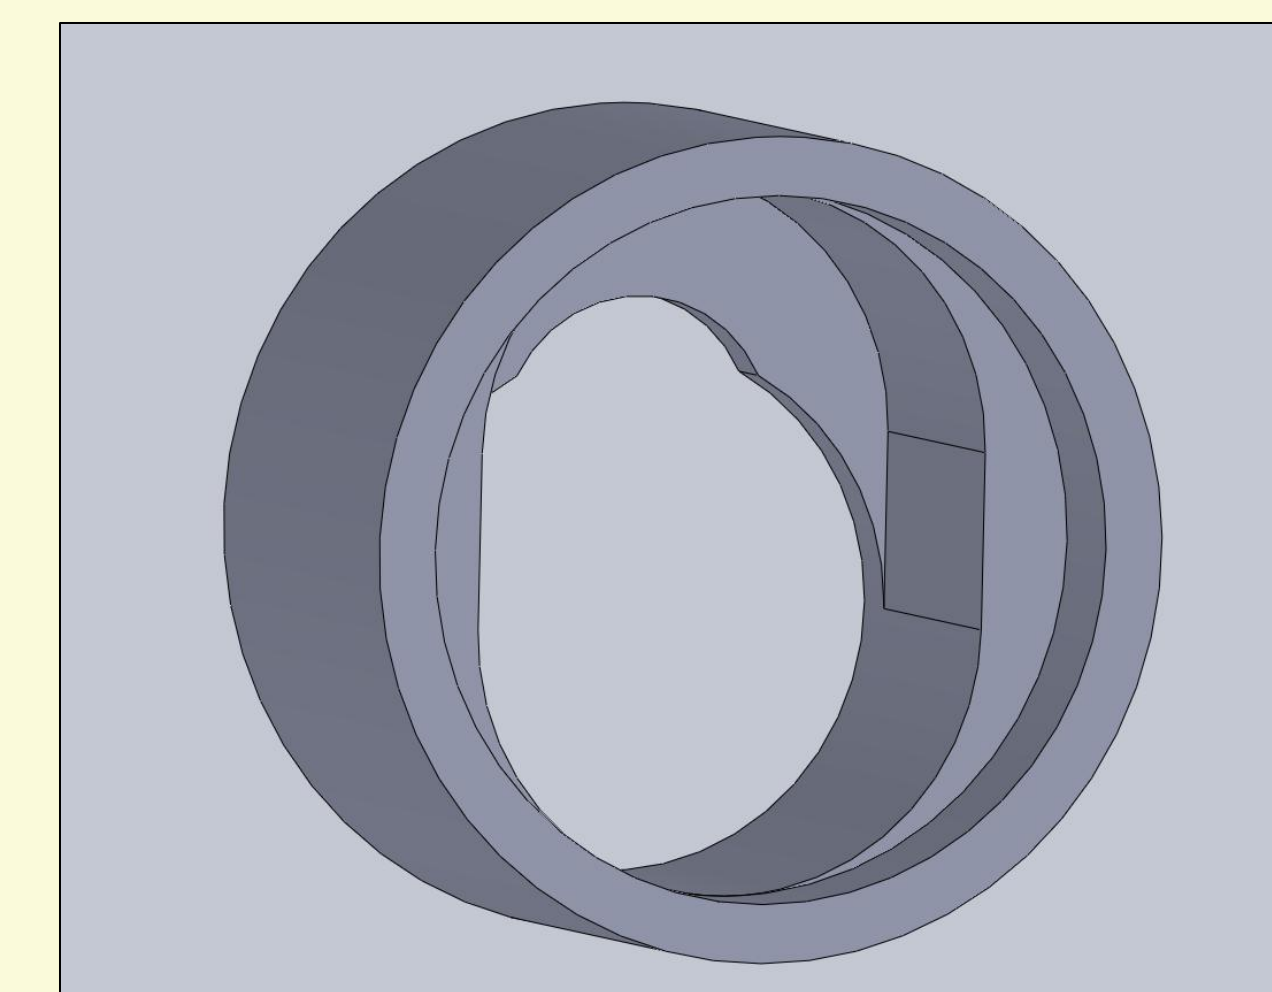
SolidWorks model of final design focused on magnet housing hole.
